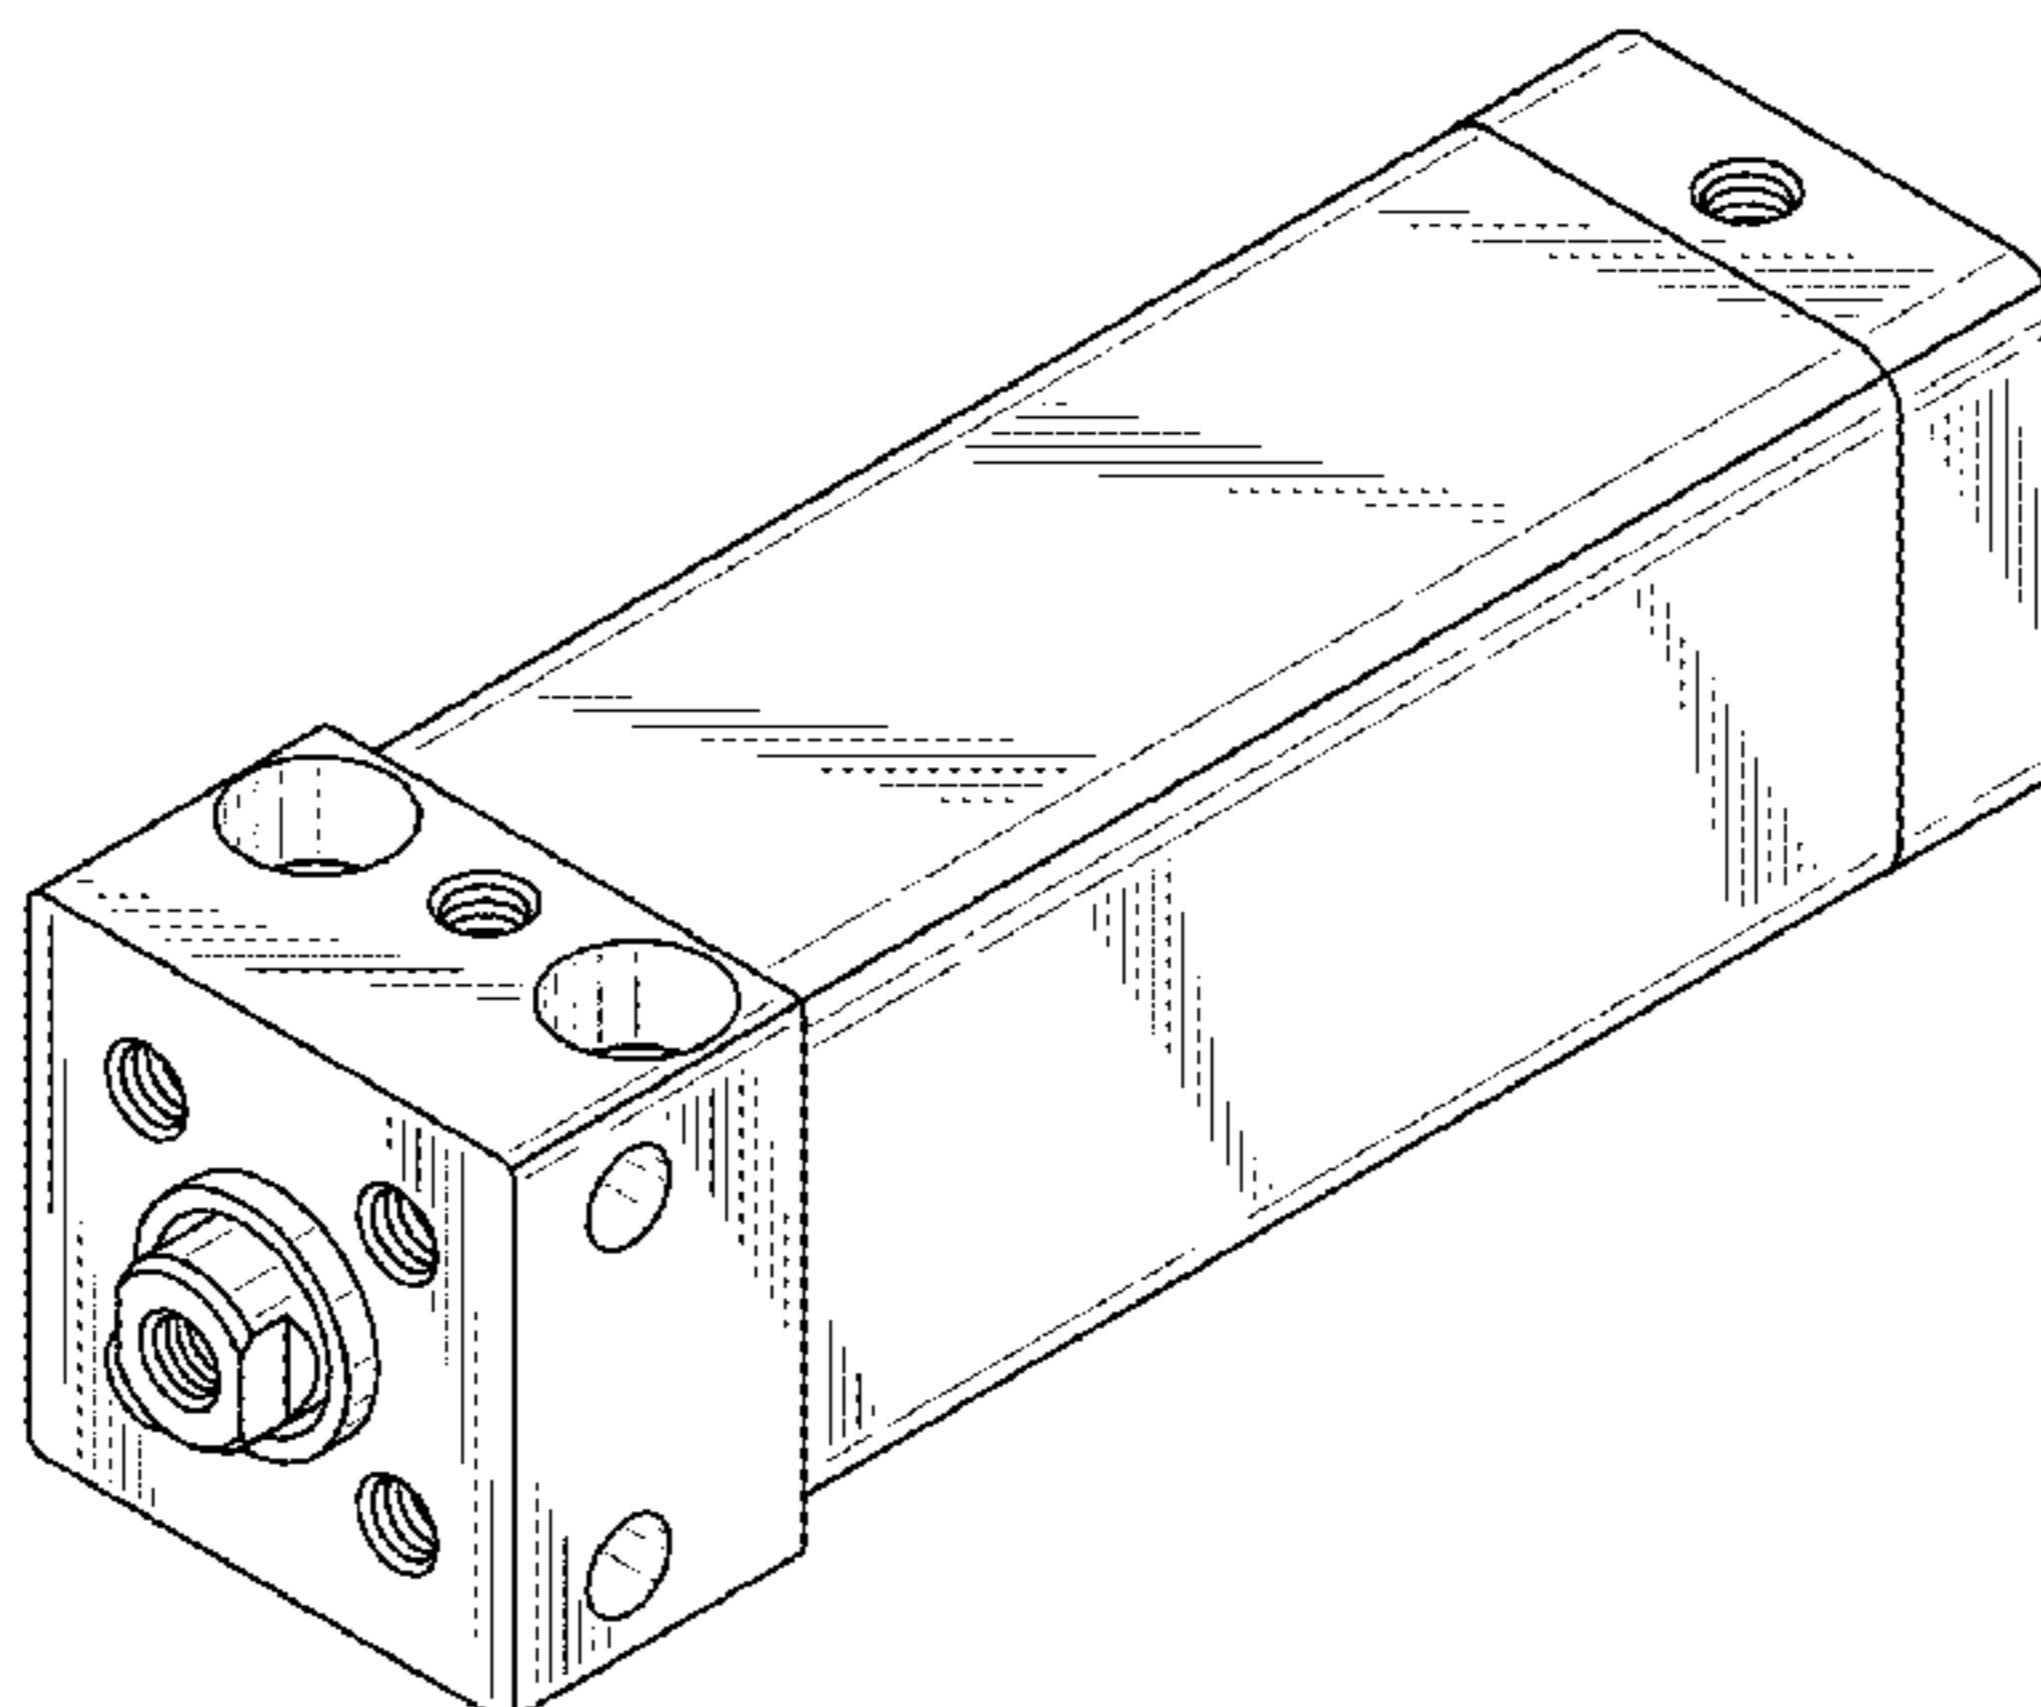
is a front, top and left side perspective view of a fluid pressure cylinder showing a fourth embodiment of our new design;
